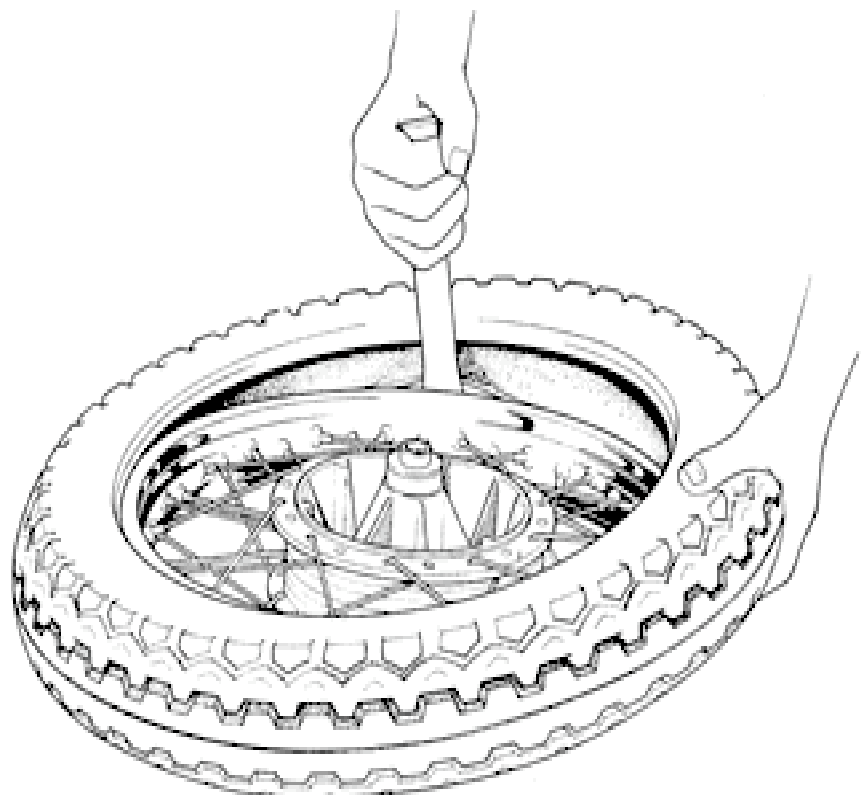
Refitting tyre to wheel with valve engaged in rim hole
